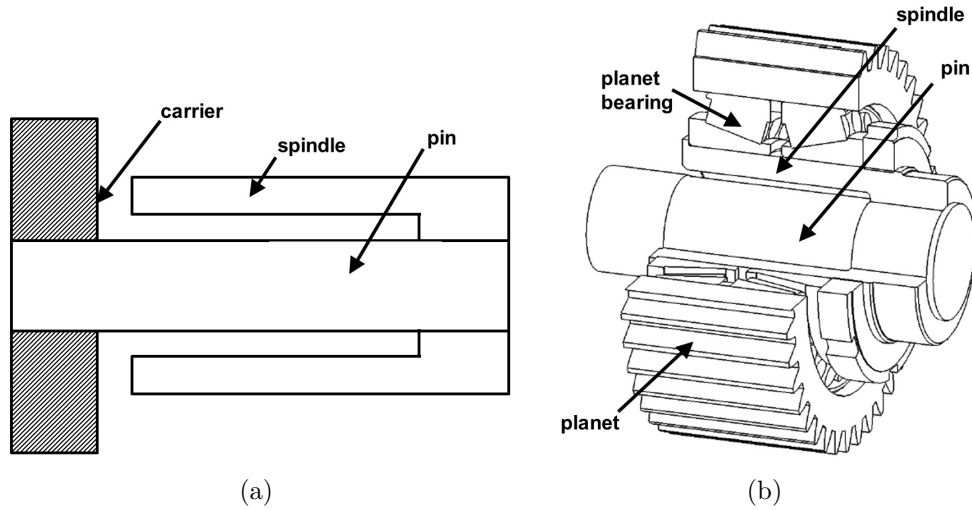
(a) Cross section of a Hicks flexible pin cantilevered to a carrier at the left and (b) cutaway view of a Hicks flexible pin showing tapered rolling element planet bearings and a planet gear.
